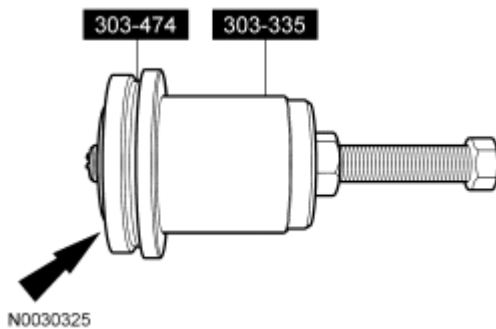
Identifying Special Tools (303--335) And (303--474)
